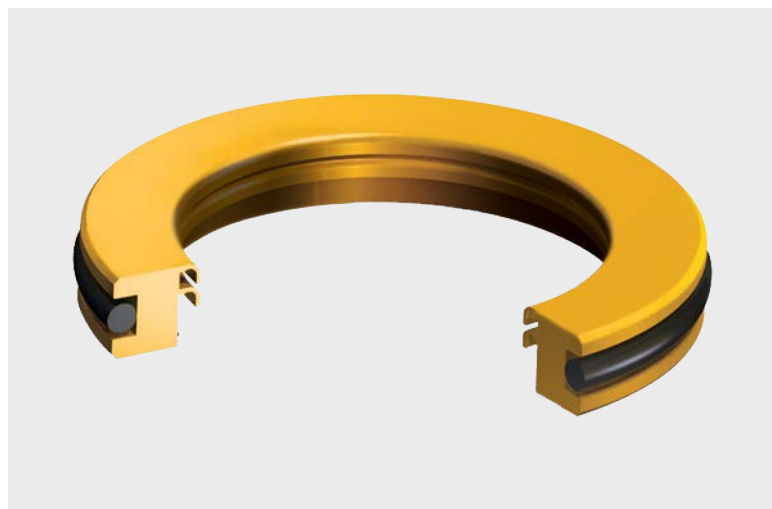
Chesterton 30K lip seal lip geometry design reduces shaft friction. The latest materials go further by removing heat from the contact points
